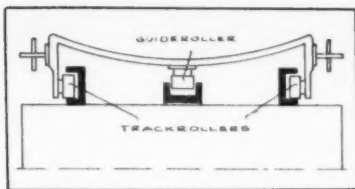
Cross section of the conveyor showing the center guide bearing and the supporting roller bearings.
